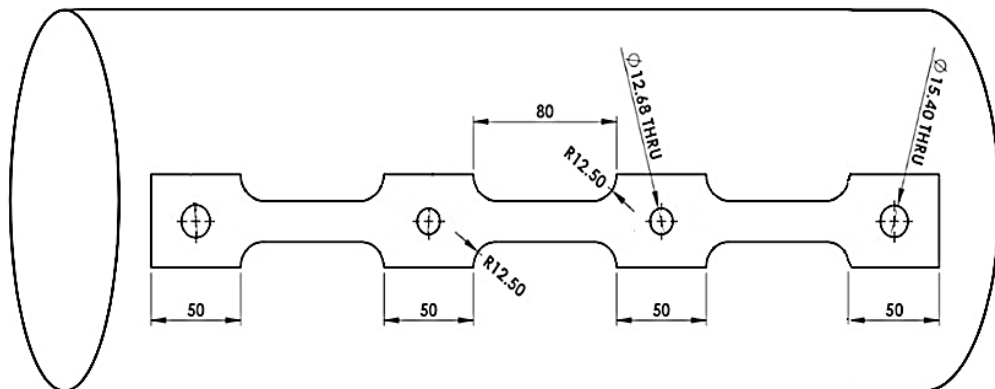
Design of long sample for C-NNpH-CF test (dimensions are in millimeters)
